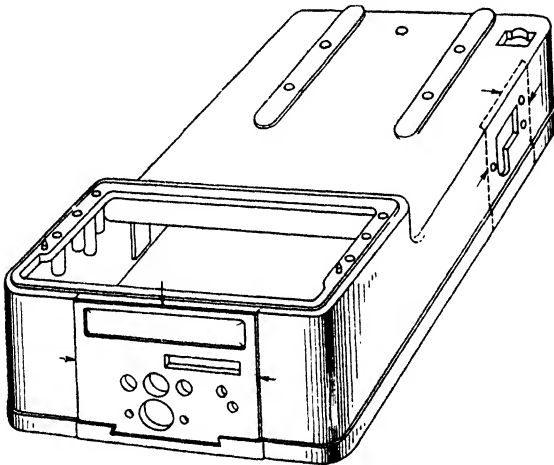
Housing for which two loose pieces are required in the mold, to make a through hole at the side, and several other through holes as well as a panel at one end. Flash lines occur where the edges of the loose sections join the mold cavity, as indicated by arrows.
